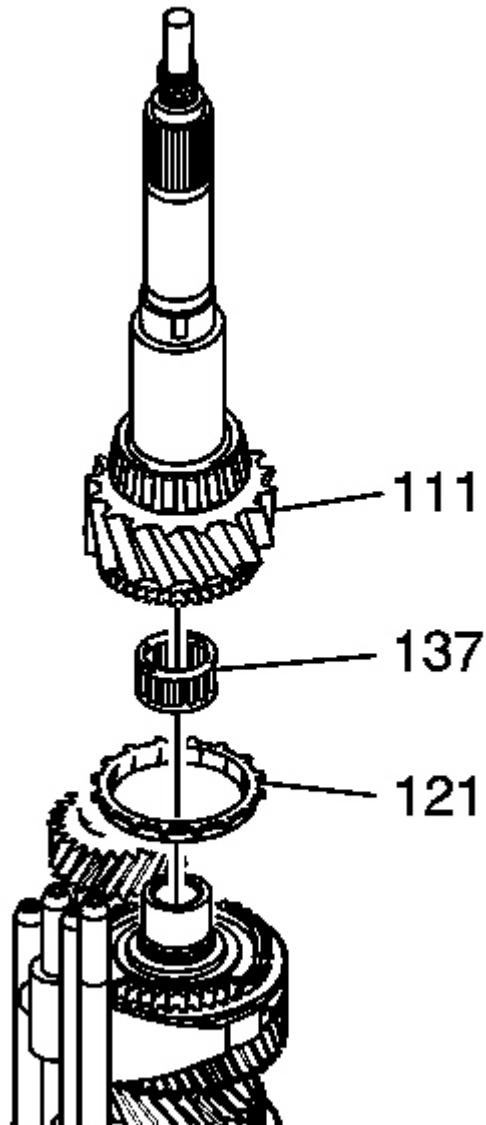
View Of Rear Output Shaft, Input Shaft Bearing & Blocking Ring
